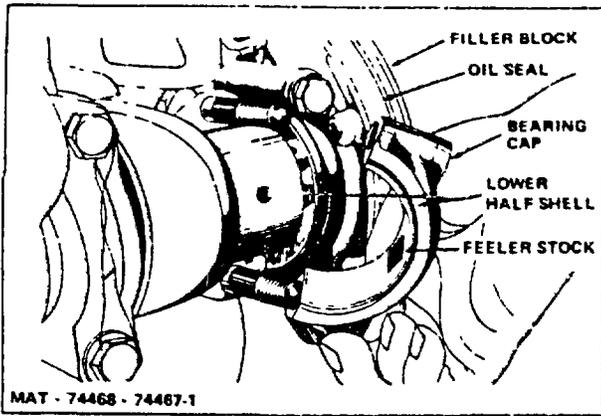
Checking Connecting Rod Bearing with Feeler Stock
